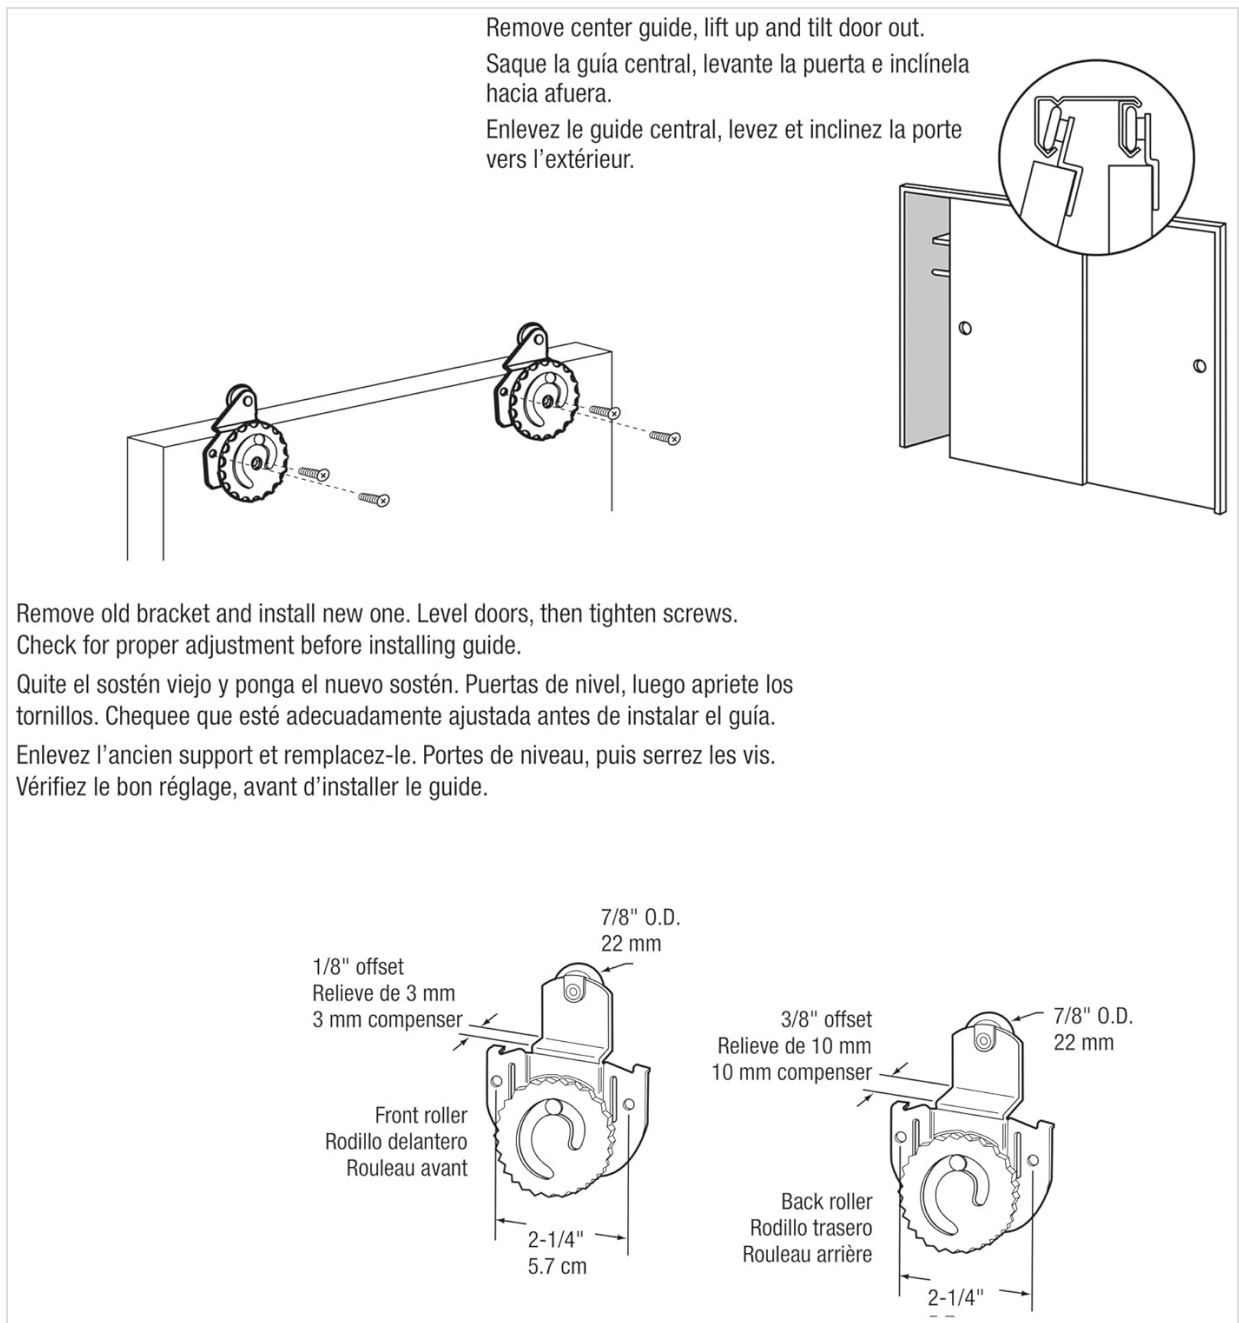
Installation Process. This diagram illustrates the steps for removing the old center guide, lifting and tilting the door, and installing the new roller assemblies with their respective offsets for front and back doors.
